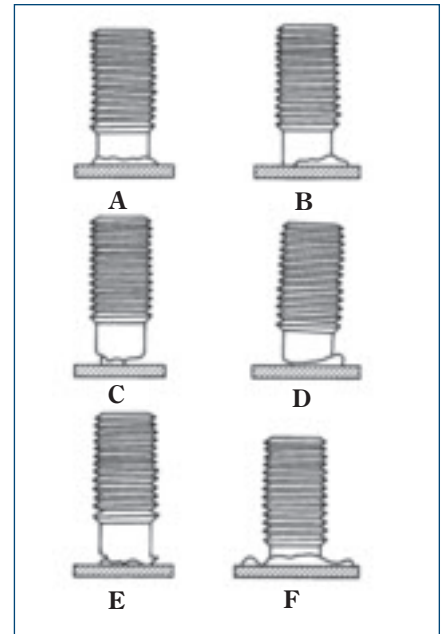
Satisfactory and unsatisfactory arc stud welds. A — Satisfactory stud weld with a good flash formation; B — stud weld in which plunge is too short; C — hang-up; D — poor alignment; E — stud weld with insufficient heat; F — stud weld with excessive heat.
